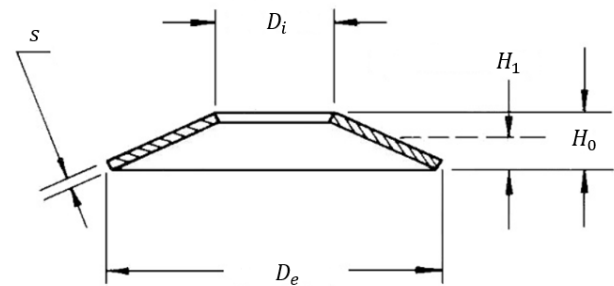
Belleville disc spring drawing [51] - *Courtesy of PIC.
